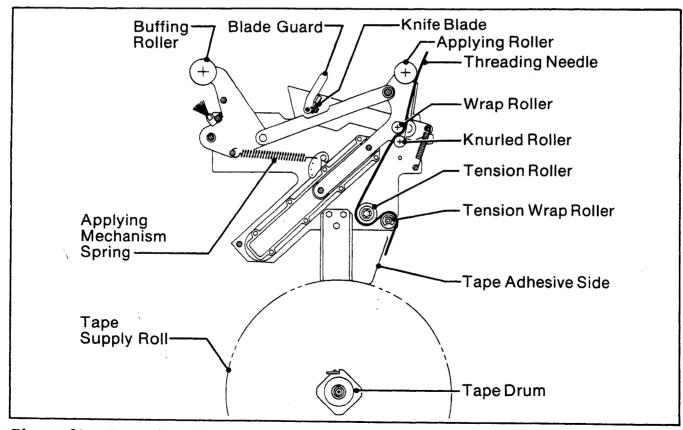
A - Tape Threading Diagram - Bottom Taping Head - Left Side View
